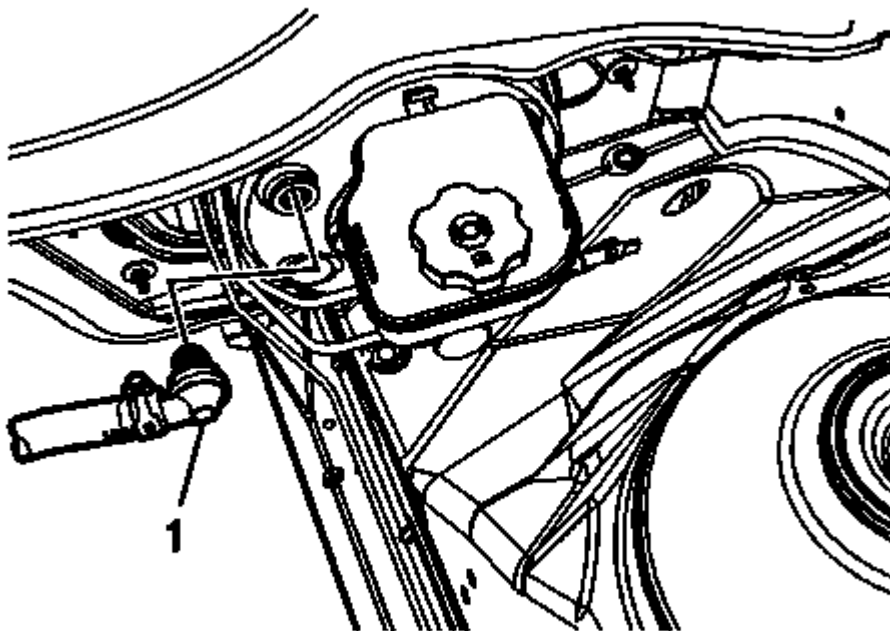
Power Vacuum Brake Booster Check Valve & Hose Assembly
